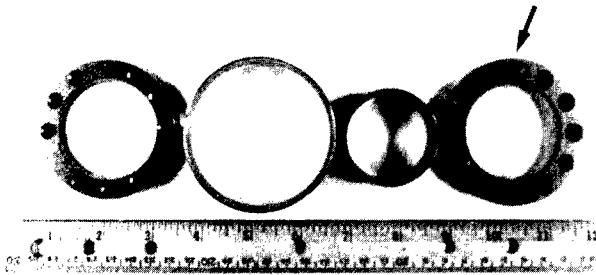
Overall view of the disassembled "Power Lock". The arrow is pointing to the crack in Ring A.
